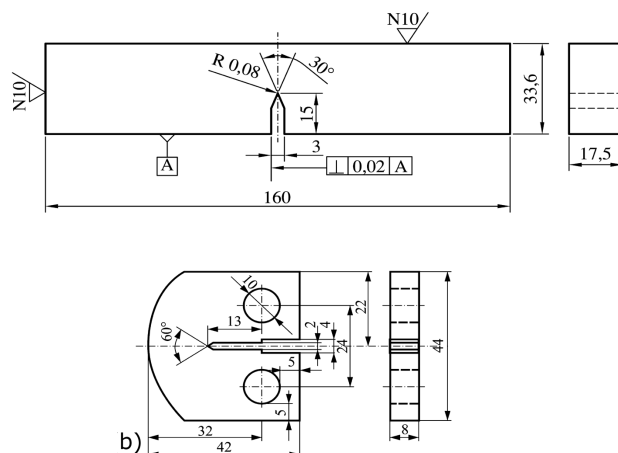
Specimen for fracture mechanic testing: a) SEN-B specimen, b) CT specimen
